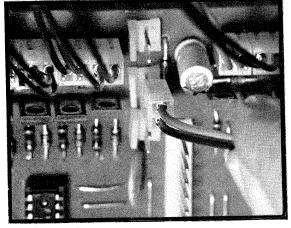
Connect Cable #4 to J3 on the Middle Driver PC Board.
